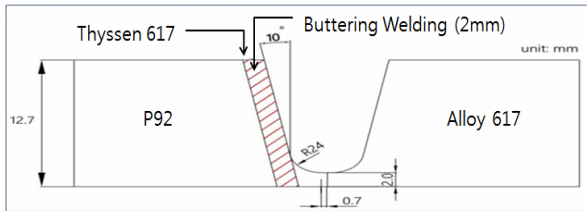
Schematic diagram of buttering and dissimilar metal welding.
